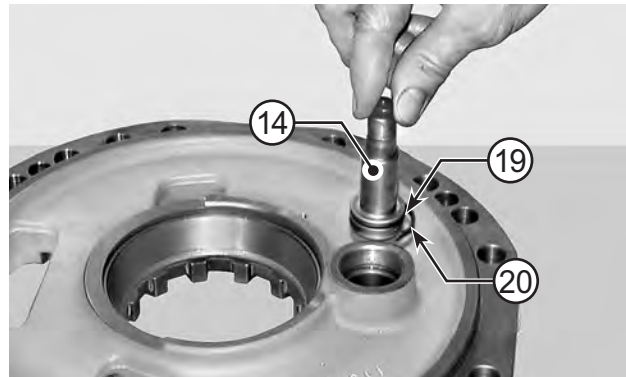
Remove piston (14) complete with o-ring (19) and guide pad (21).
